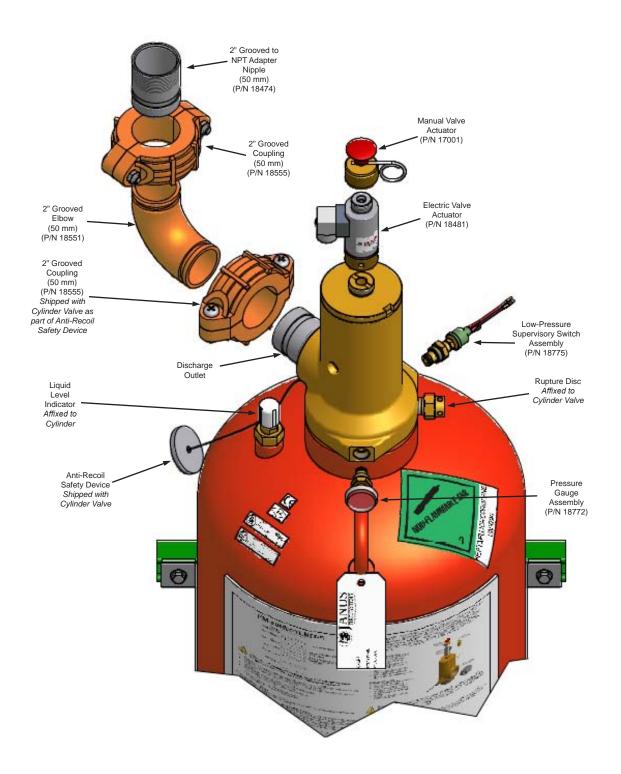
Mv Cylinder Valve w/ Trim Kit
